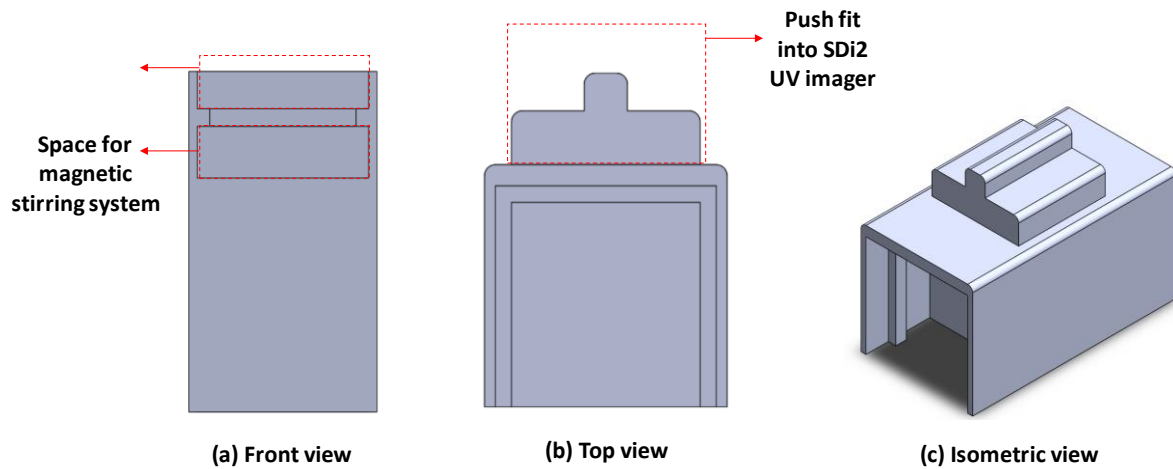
3D CAD model (a) Front view (b) Top view (c) Isometric view of the stand designed to secure the 3D printed diffusion cell in SDi2 UV system.
